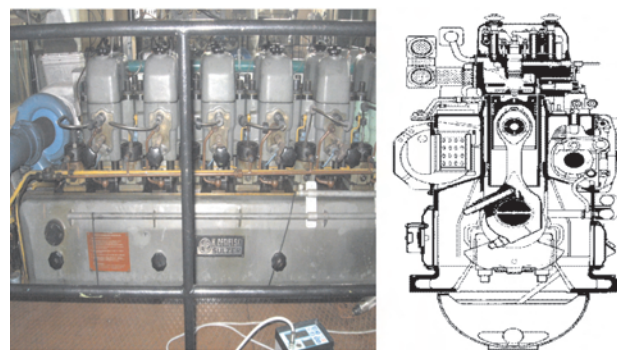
The view and a cross-section of a SULZER 6AL 20/24 engine
